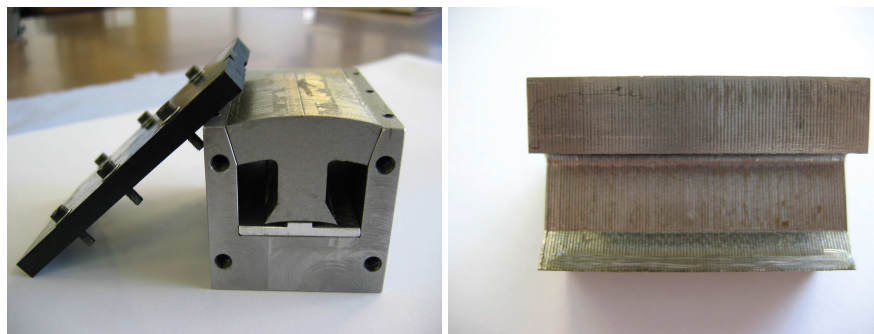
50mm stator piece inside the jig and a close-up on the glued and cured 50mm piece
